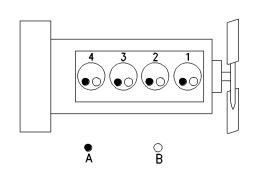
00296424Cylinder and valve location(A) Exhaust valve (B) Inlet valve
